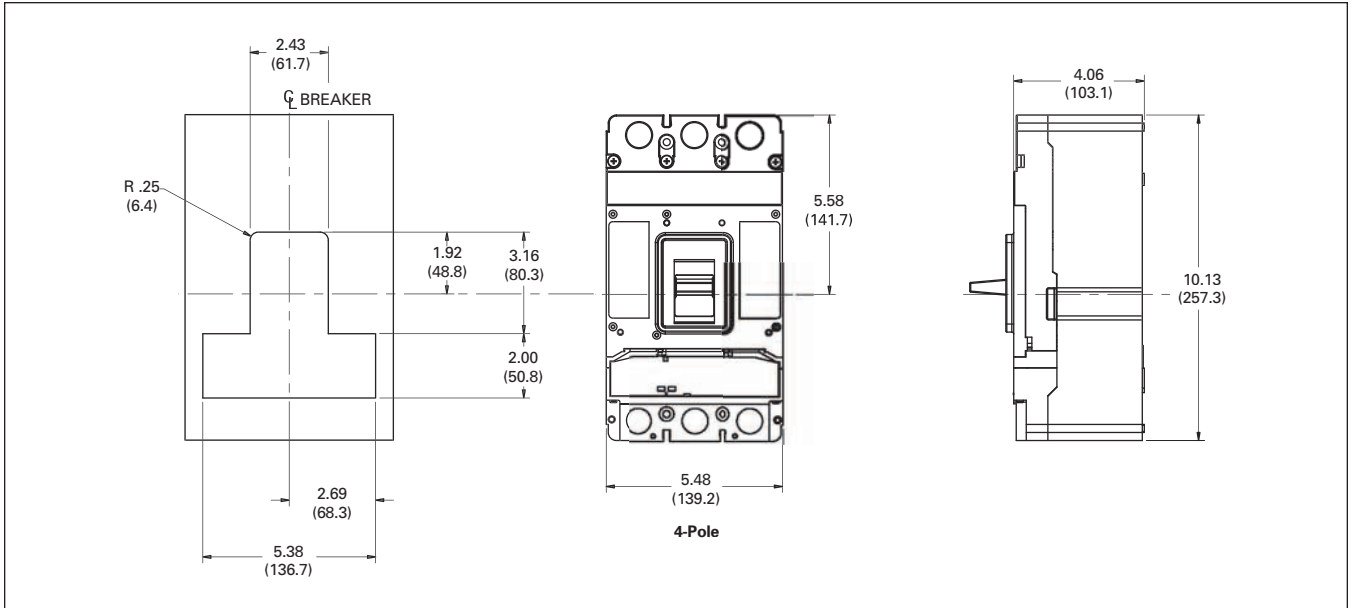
LG-Frame — Dimensions in Inches (mm)
